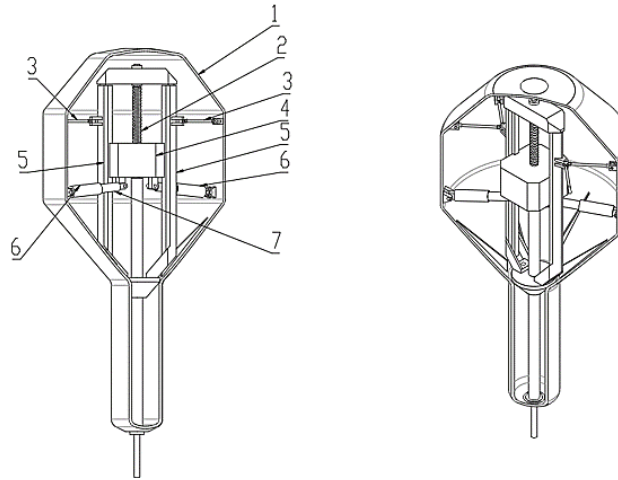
3D structural diagram of the device: 1-Shell 2- Intermediate rod 3- Hinge rod 4- Slider 5- Slide rail 6- Piston 7- Piston rod
